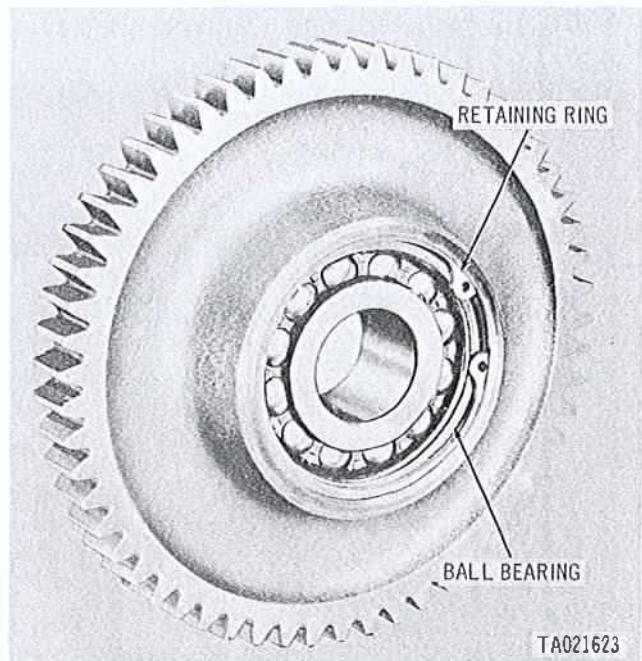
Removing generator idler gear retaining ring and ball bearing.
